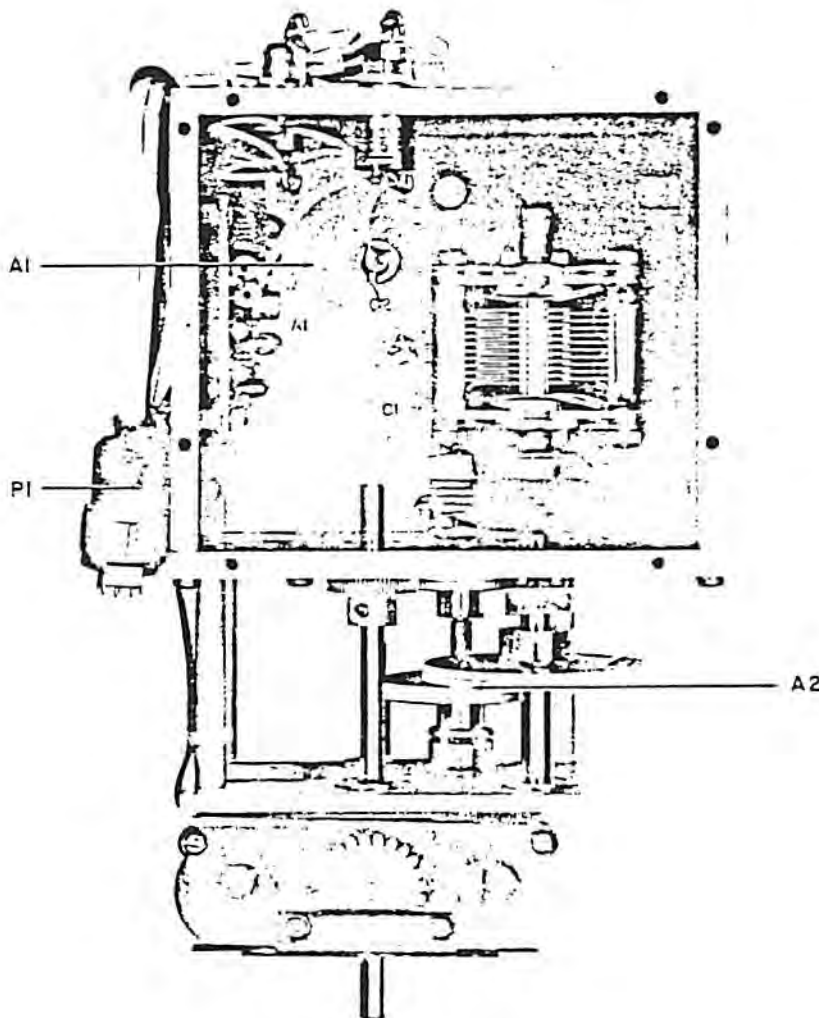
Type 71217 Tuning Assembly, Component Locations
